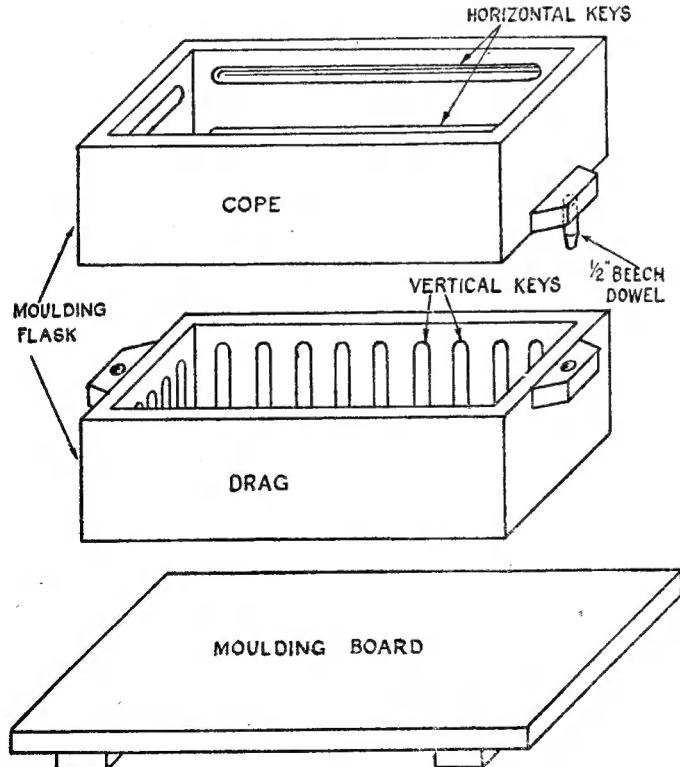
Constructional details of moulding flask, showing two methods of keying sand to inside surfaces
